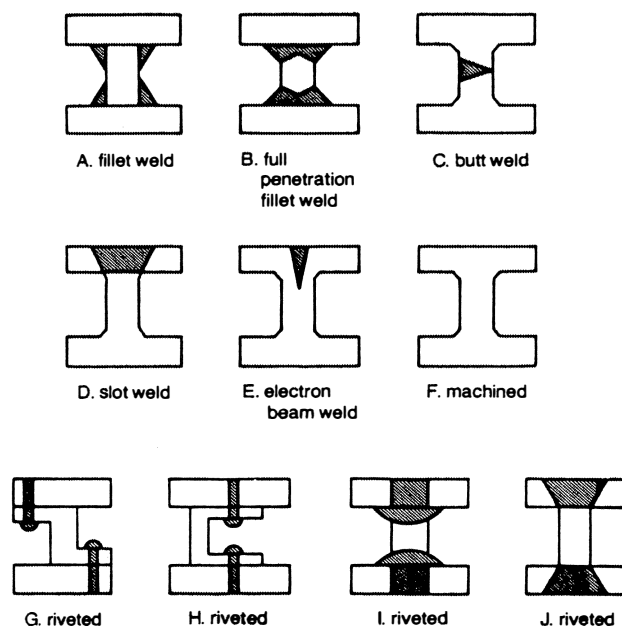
Several Fabrication Techniques for Centrifugal Impellers.
